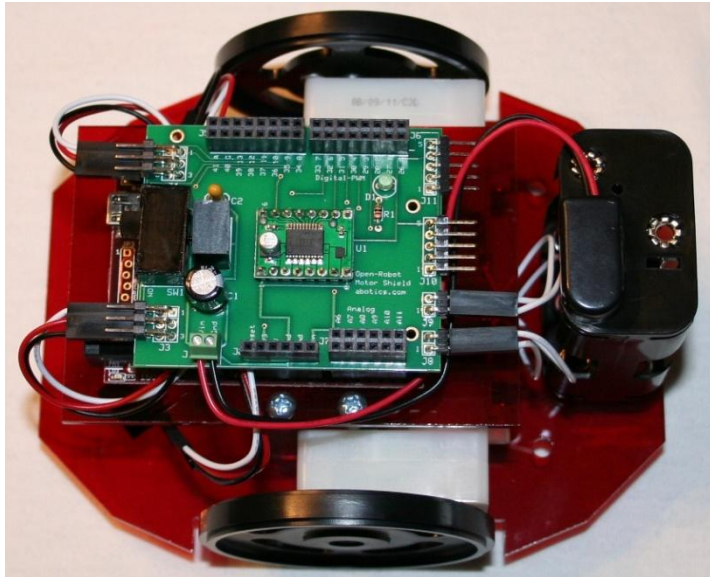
Install Battery Pack & 9-Volt Style Connector to Terminal J2.
